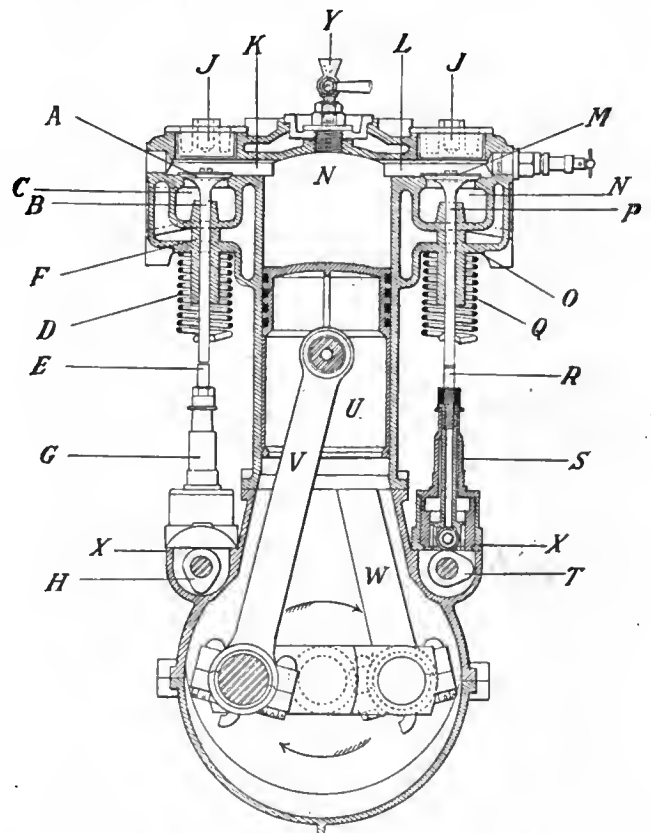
VERTICAL SECTION OF TYPICAL FOUR-CYCLE MOTOR WITH MECHANICALLY OPERATED VALVES.
